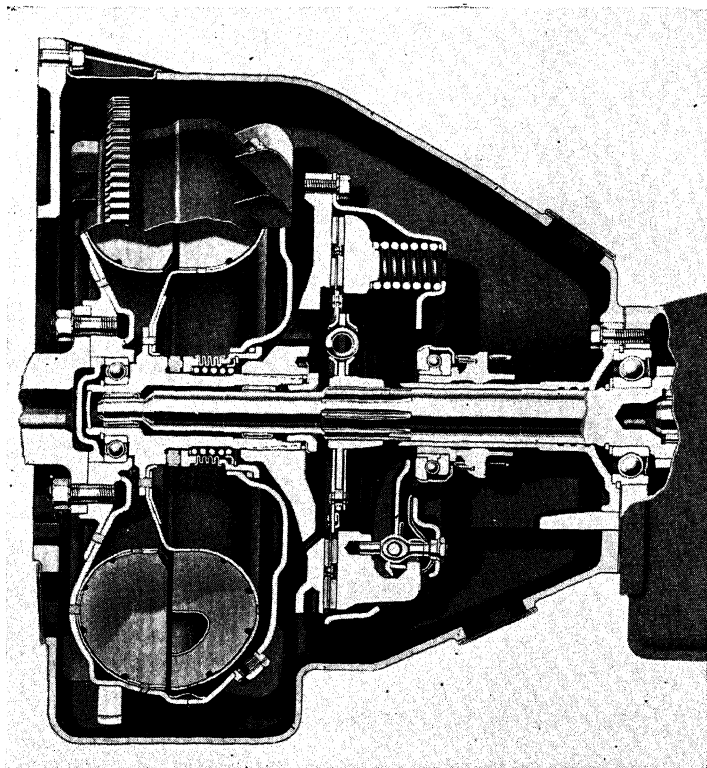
Single-disk plate clutch combined with a hydraulic coupling. (Chrysler, 1941.)
